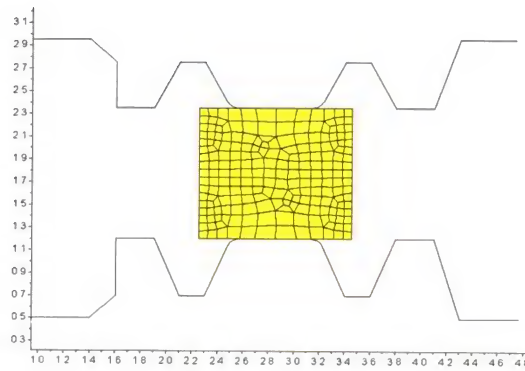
Initial Setup of Upper Roller, Lower Roller, and Work piece
